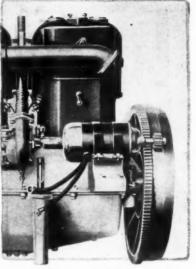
Method of fitting Rushmore cranking motor to Simplex engine
